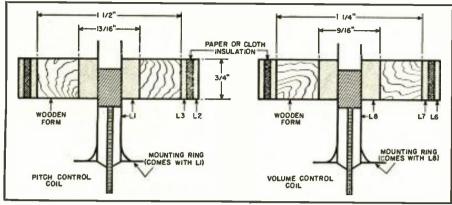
Cross-sectional details of control coils. Dimensions should be exact.
